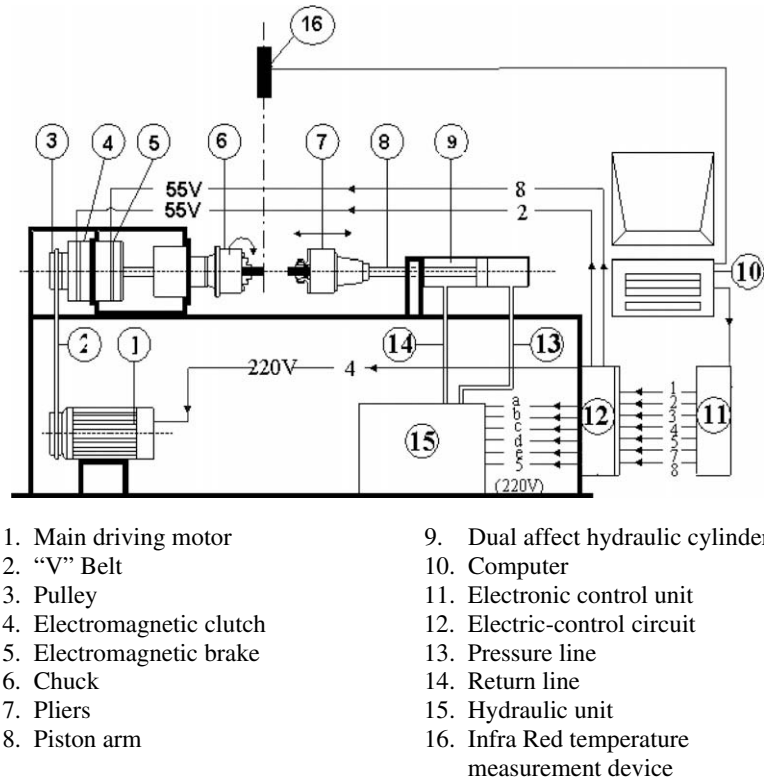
Scheme of the continuous driving friction welding machine.
